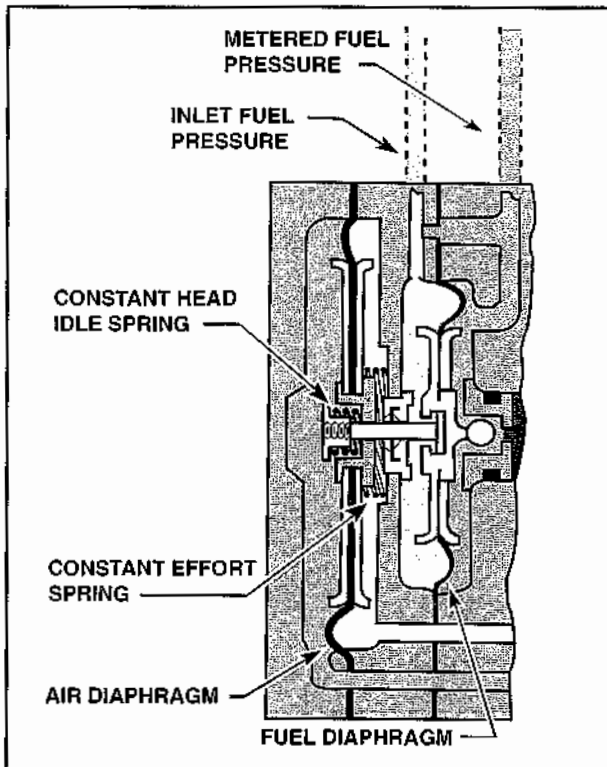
The idling system consists of a constant-head idle spring opposing a constant-effort spring to pull the ball valve off its seat.
